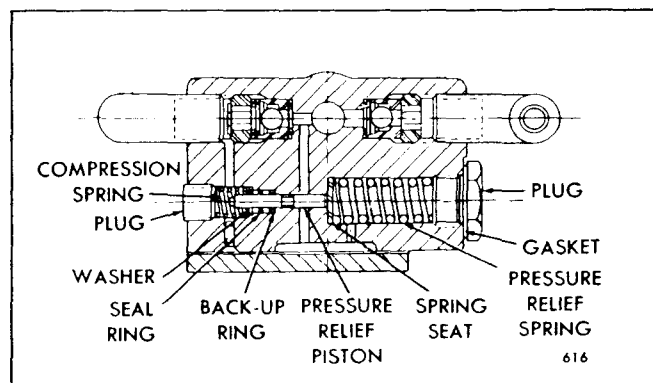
Engine-Driven Hydrostarter Charging Pump Pressure Relief Piston Assembly
